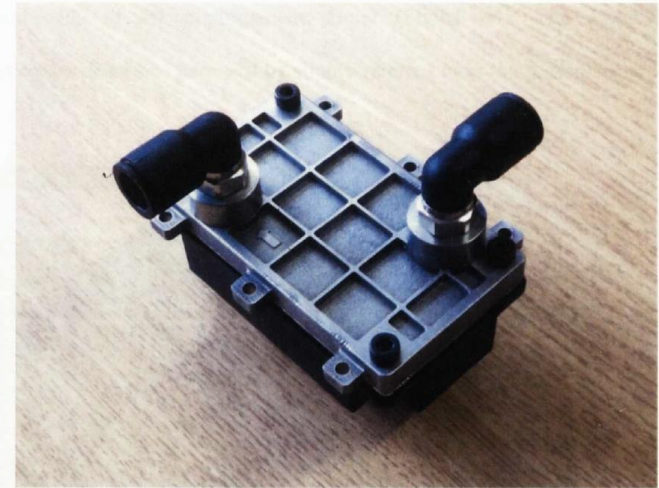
The assembled direct baseplate impingement cooler showing inlet and outlet water connections.
